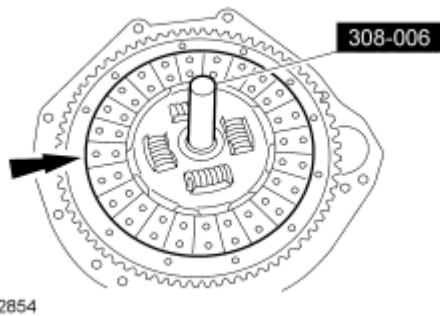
Locating Transmission Input Shaft Pilot Bearing
